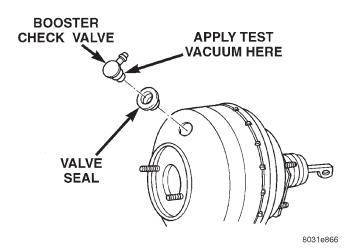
Vacuum Check Valve And Seal COMBINATION VALVE
